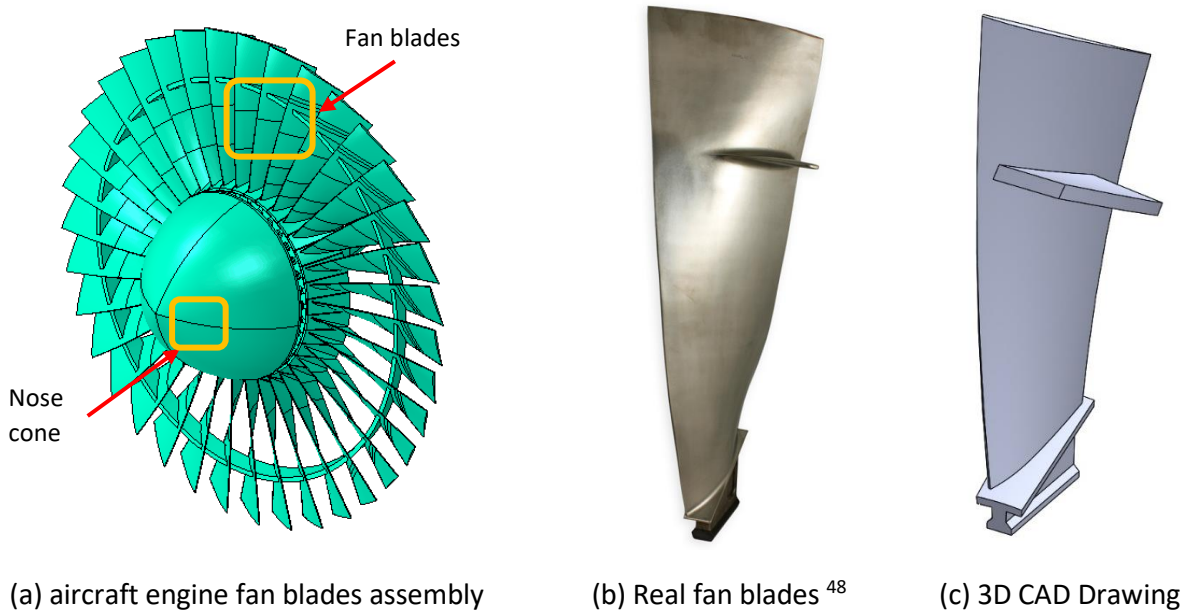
Geometry for aircraft engine model: (a) assembly of aircraft engine fan blades; (b) real fan blades and (c) 3D CAD drawing of fan blades.
